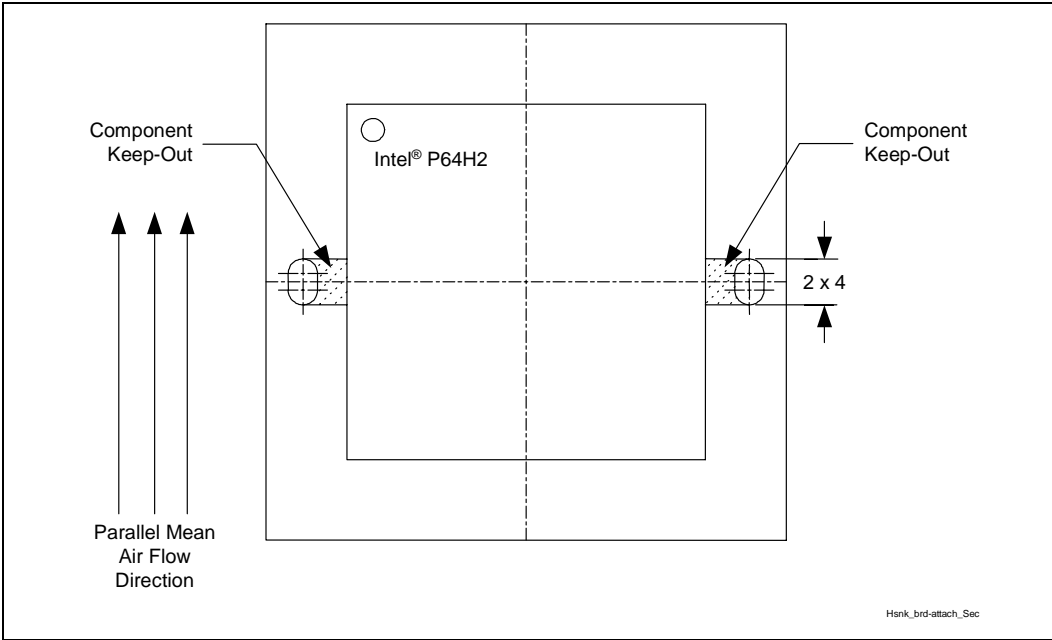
Clip Heatsink Board Attach Location and Keep-Outs (Primary Side)
